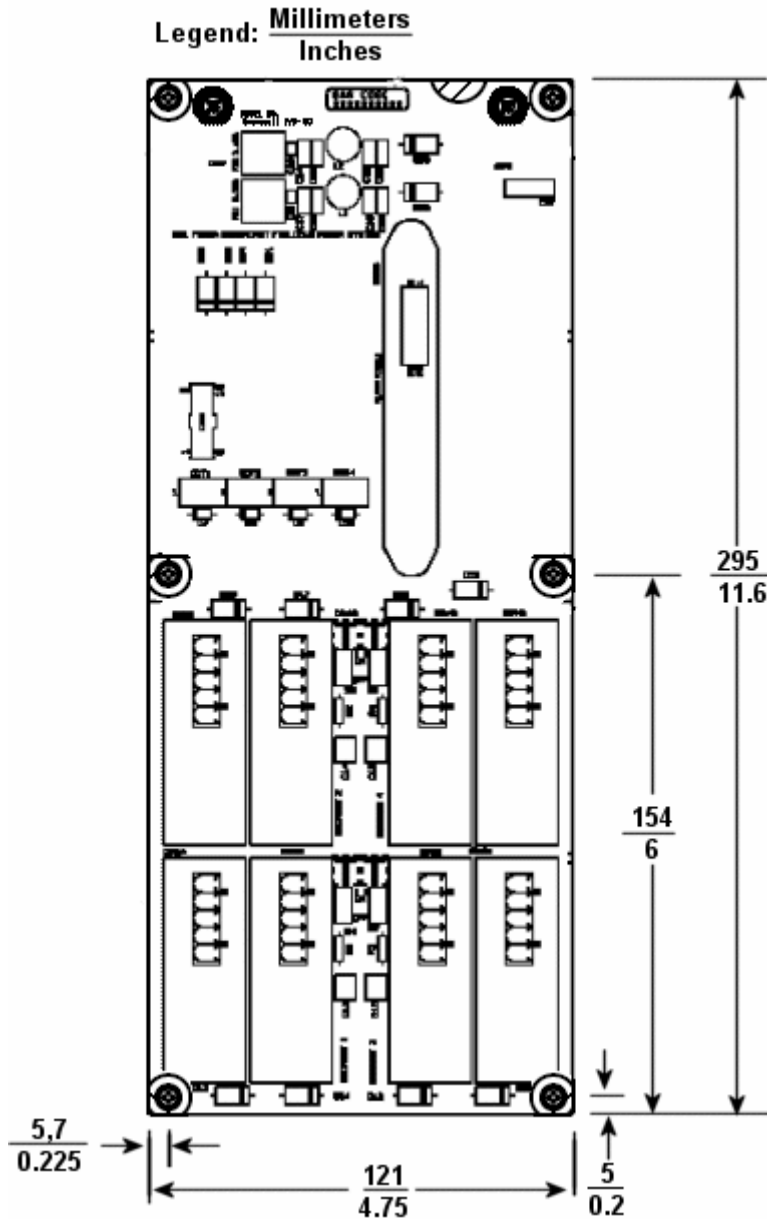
Mounting Dimensions for Redundant Power Conditioner IOTA F660A
